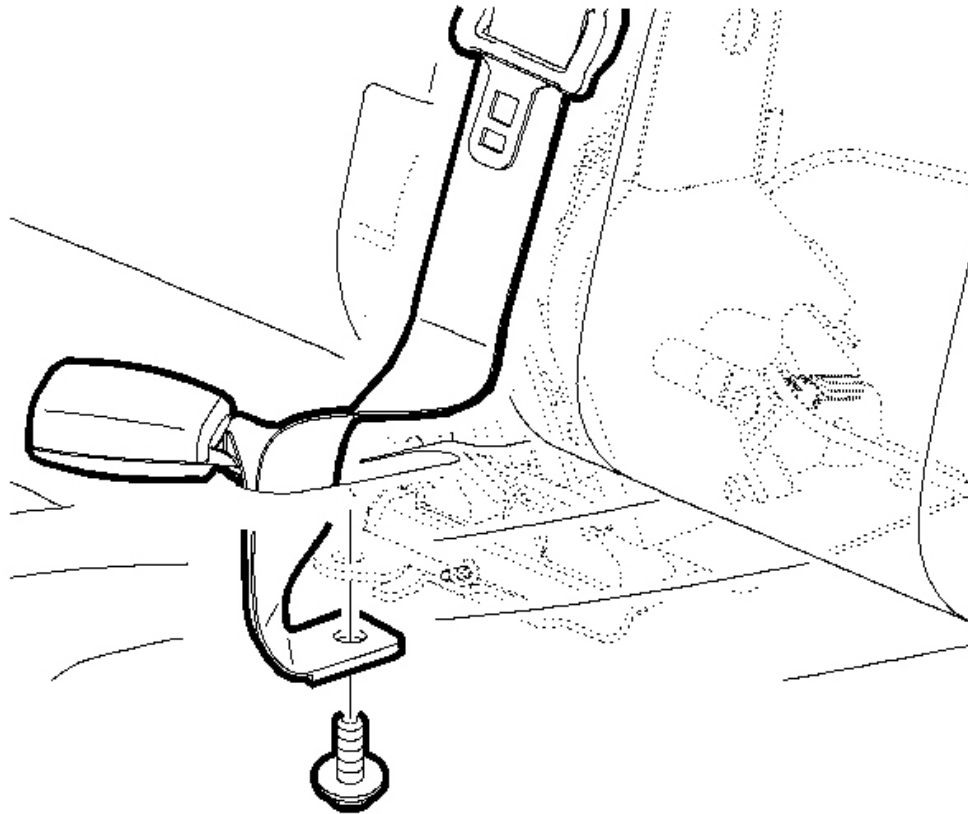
Removing/Installing Shoulder Belt Anchor Bolt & Plate
